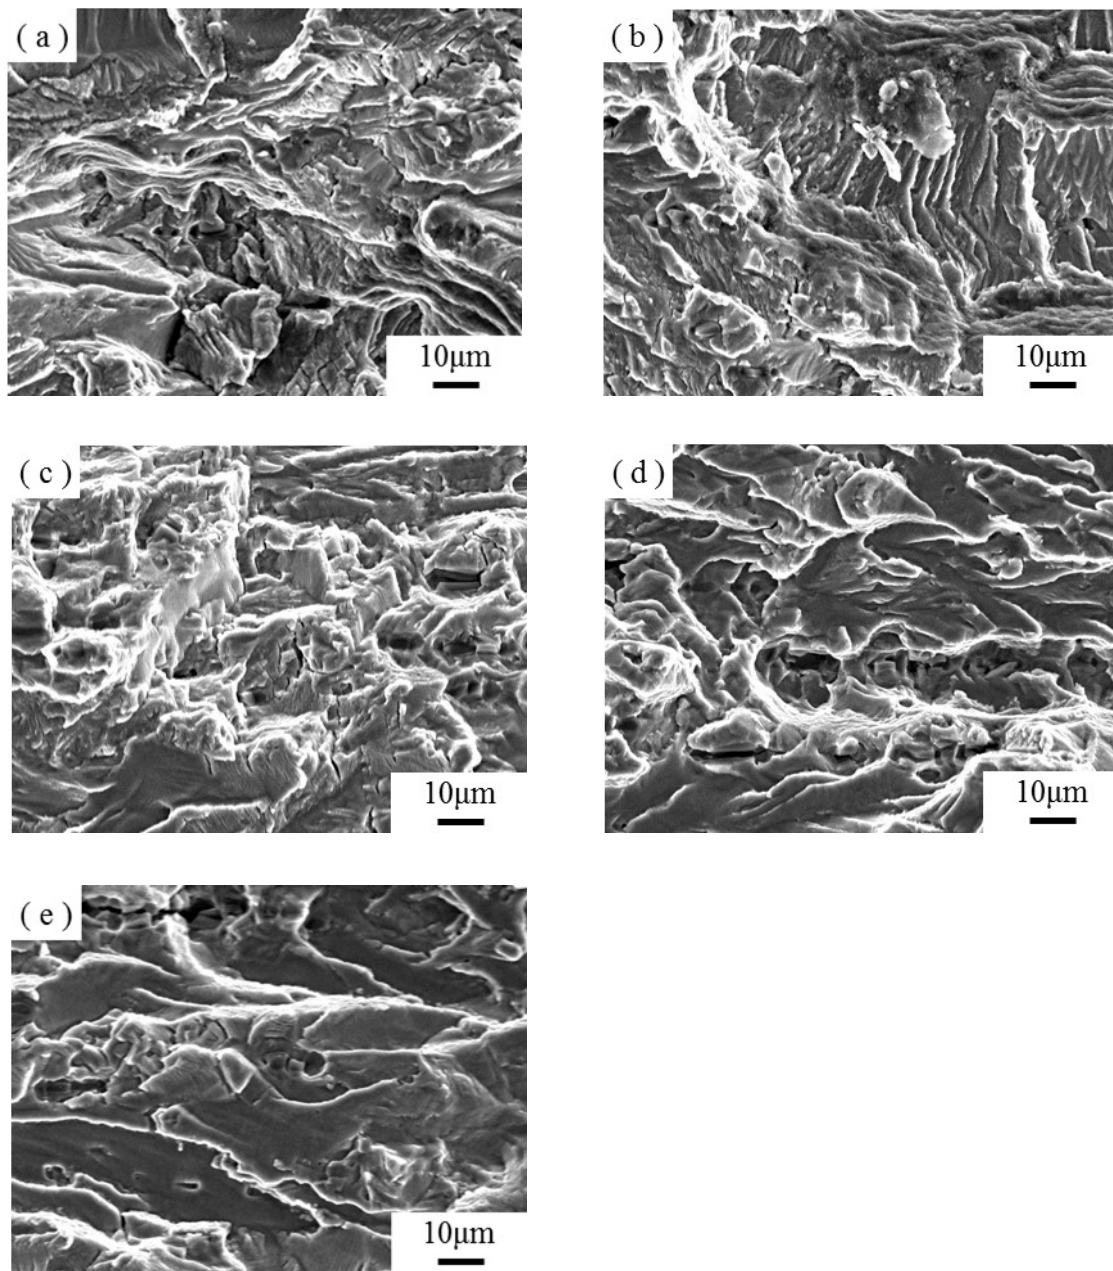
Fracture surface of A6061-T6 after FCP test.
